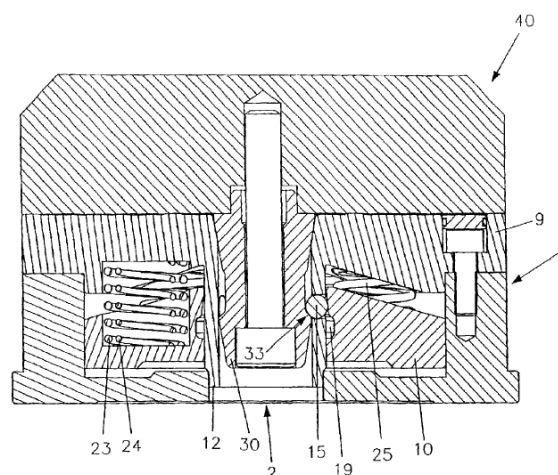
Sectional view of the clamping chuck with the work piece carrier clamped thereto.
